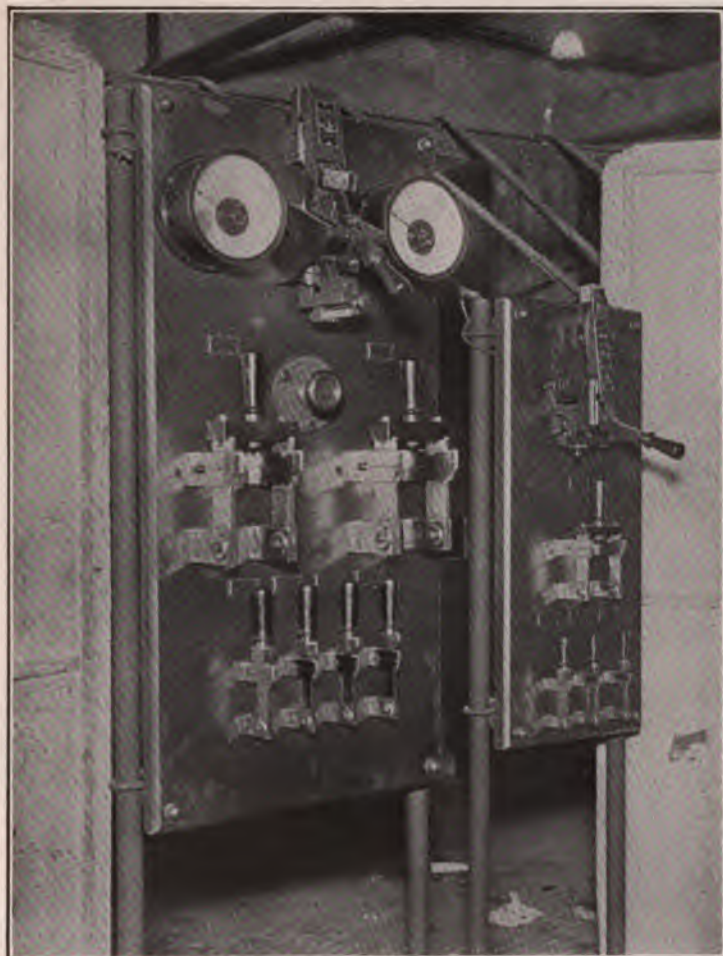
Front view of arc welding control panel; on left panel for control of 500 amp. generator and welding circuit. On right panel outlet for metal electrode welding.
